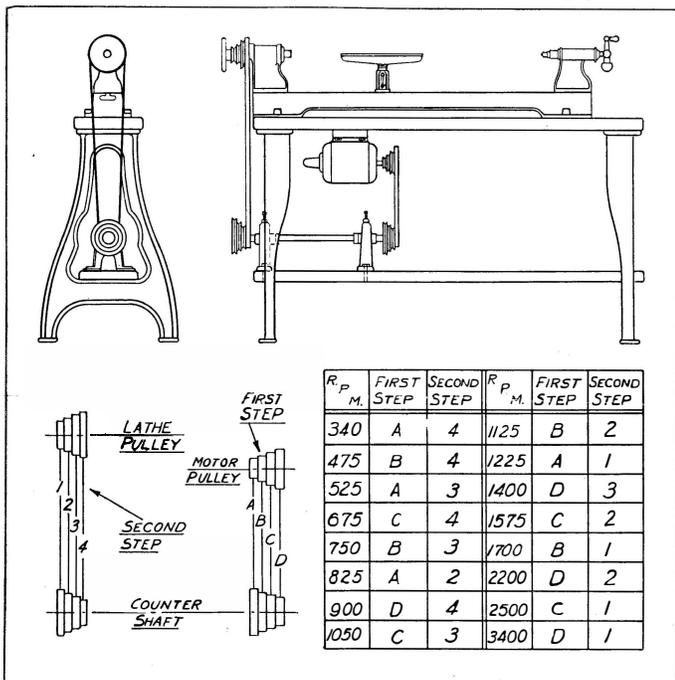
Illustrates lathe with countershaft on No. 1463 stand.
